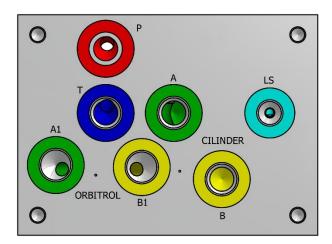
CONNECTIONS FOR THE HYDRAULIC LOAD SENSE MANIFOLD
